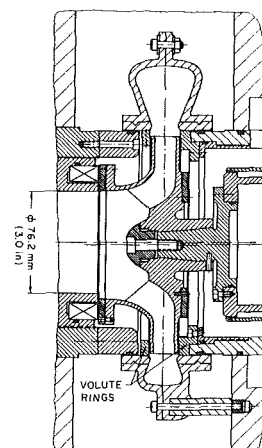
Assembly drawing of Impeller X and Volute A installed in the test section
